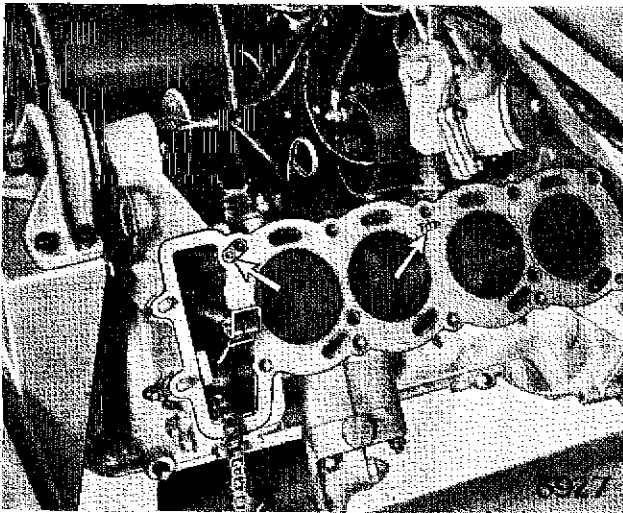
Positions of small sealing rubber ring and word TOP on cylinder head gasket
